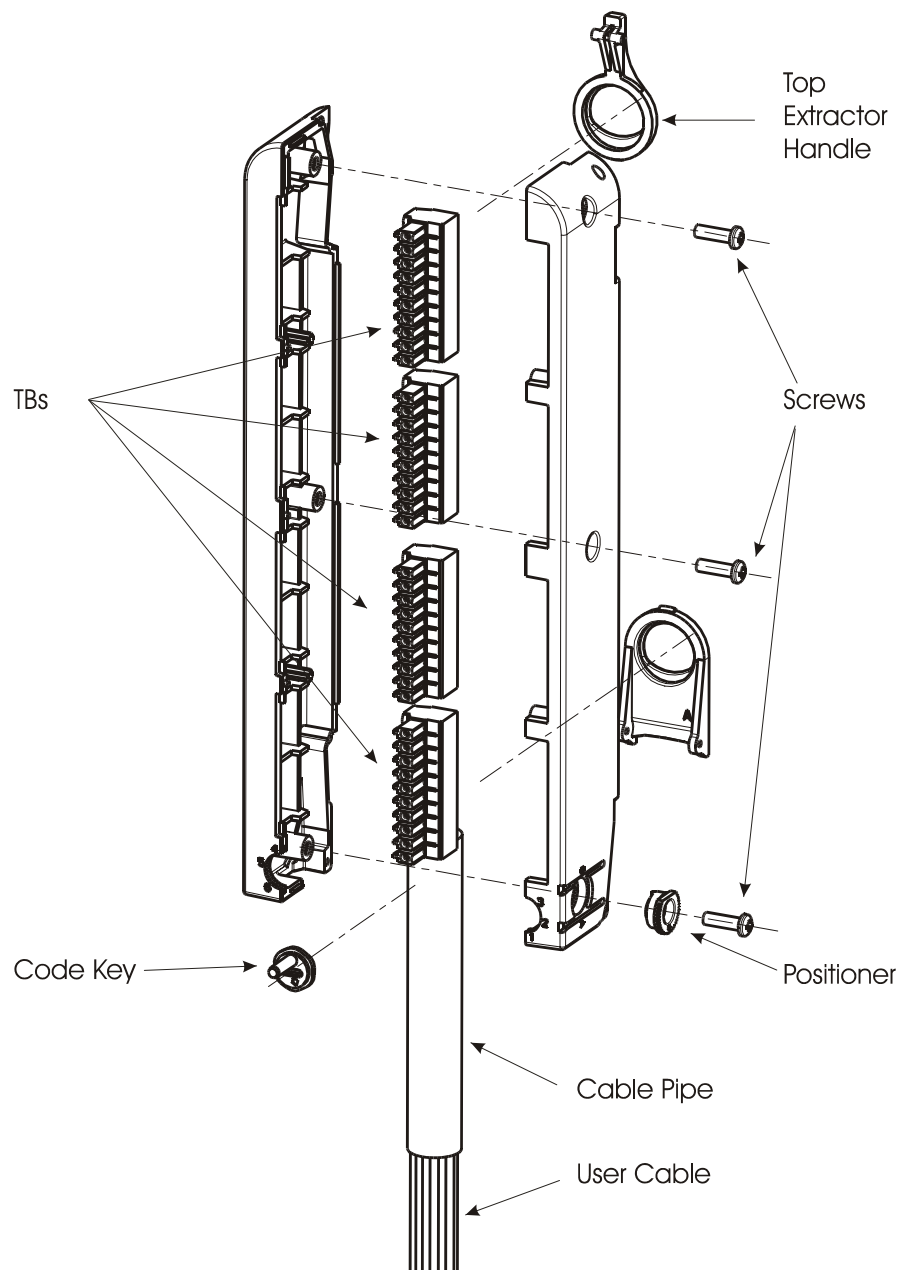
Terminal Block (TB) Holder Assembly – Exploded View with Coding
